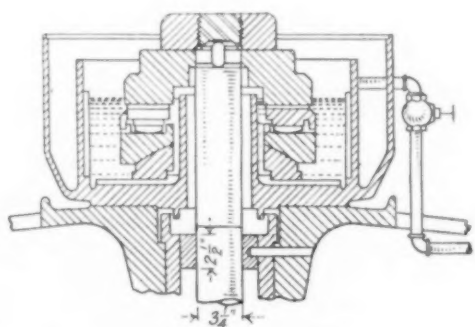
SECTION THROUGH THRUST BEARING EMPLOYED IN THE TESTS
